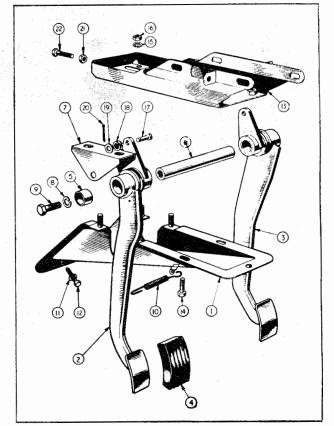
Exploded view of Pedal Assembly. (R.H.S. shown.)
